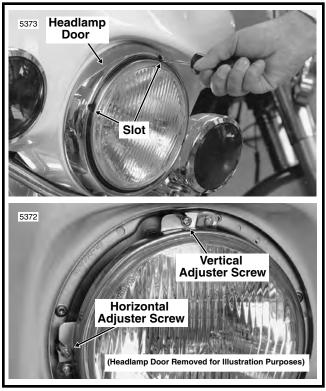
Adjust Headlamp Alignment - FLHTP-I
